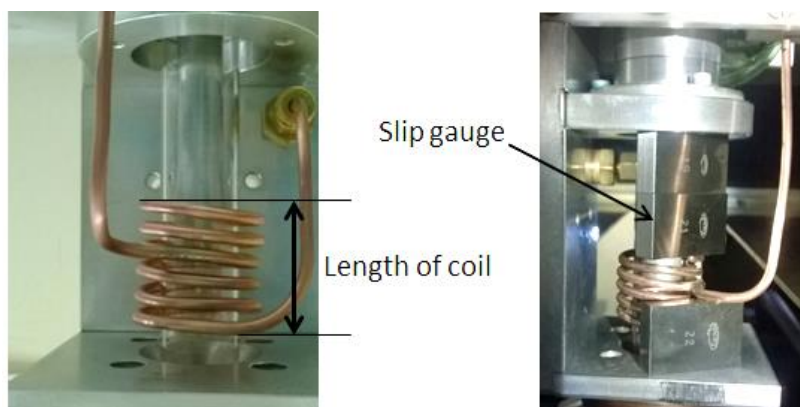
Photo showing the length of coil (left) and its measurement method (right)
